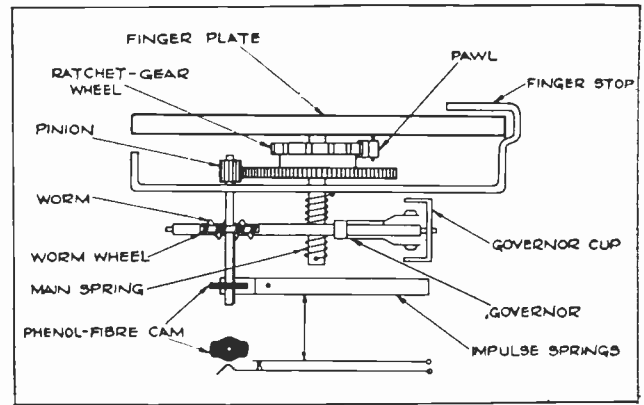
Another view showing some parts of the dial mechanism more clearly.
